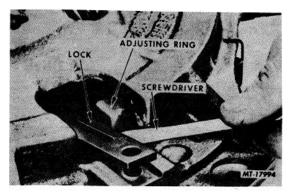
Removing Adjusting Ring Lock (Dana Angle Spring Clutch) (Manual Adjustment Type)
